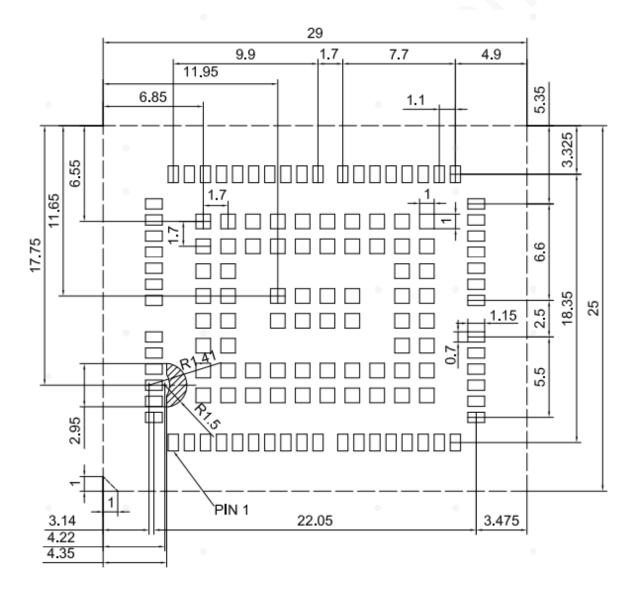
N717-EA application PCB package (top view, unit: mm)
